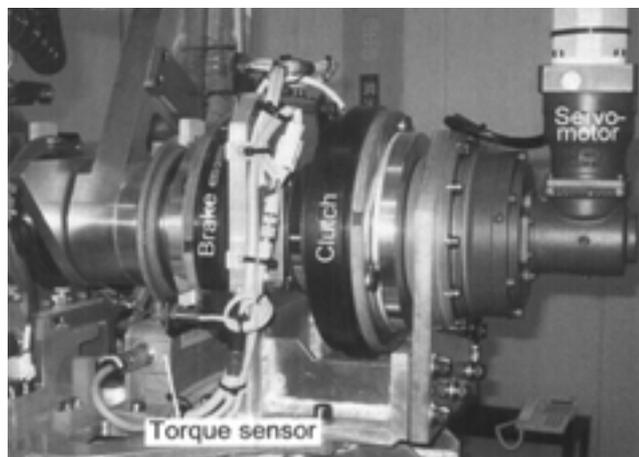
Torque controlling mechanism of shoulder bend joint of manipulator.
